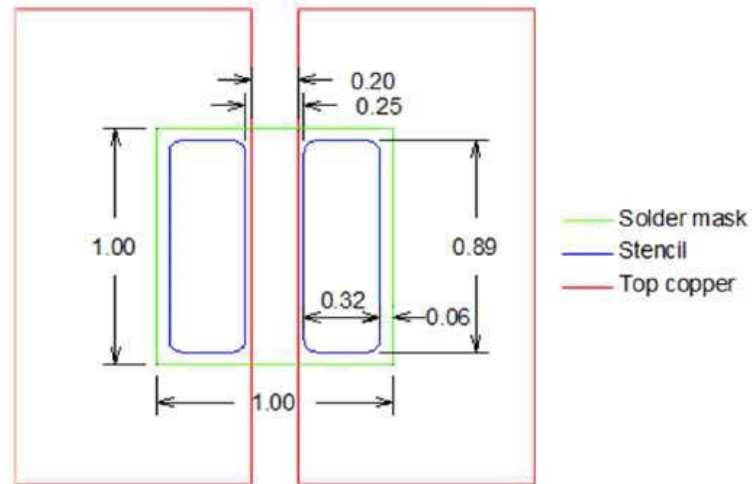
Solder pad layout of LxF2-Uzzz1000yyyy1.
